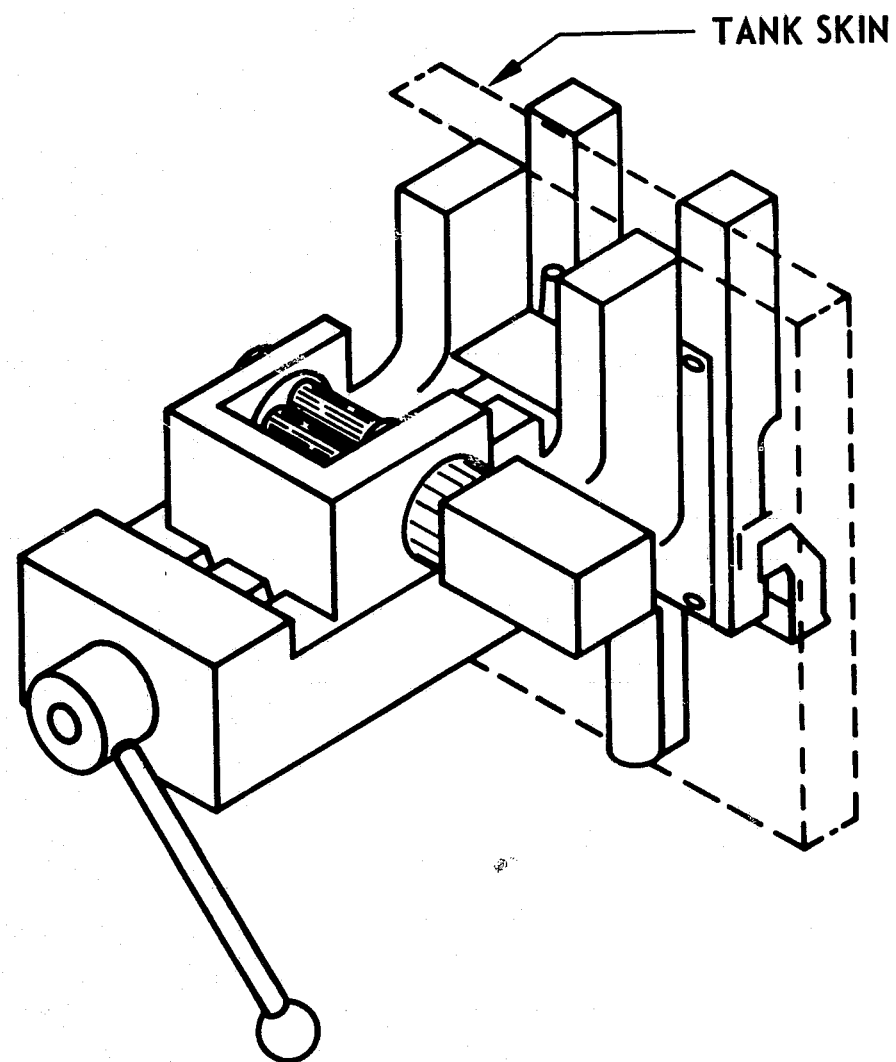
WELD FIXTURE ASSEMBLY ALIGNMENT CLAMP
